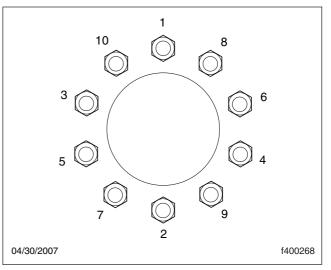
, Tightening Pattern, 10-Hole Wheels
